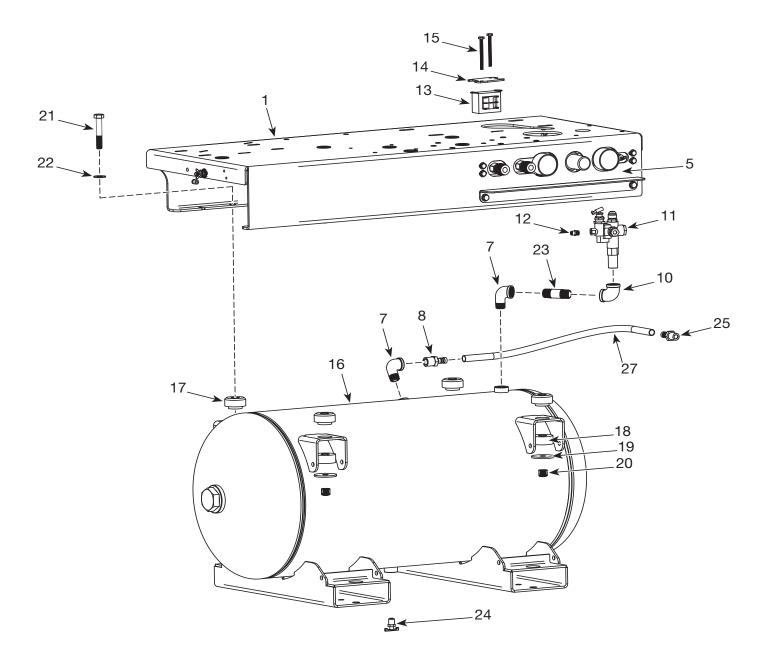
Chassis Assembly for BD3200 shown; common parts for all models are detailed on page 27
